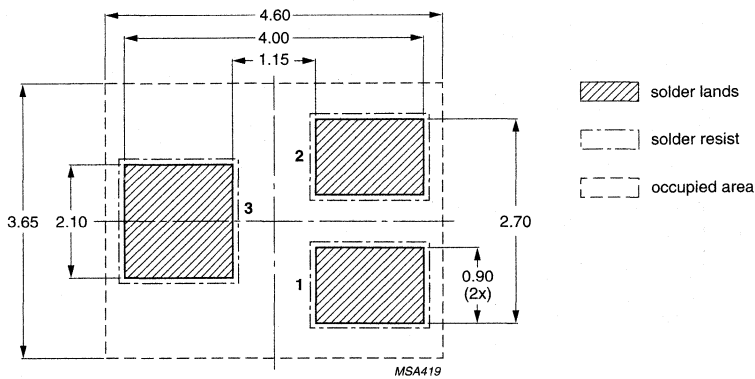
Wave soldering footprint for SOT223; typical dimensions.
